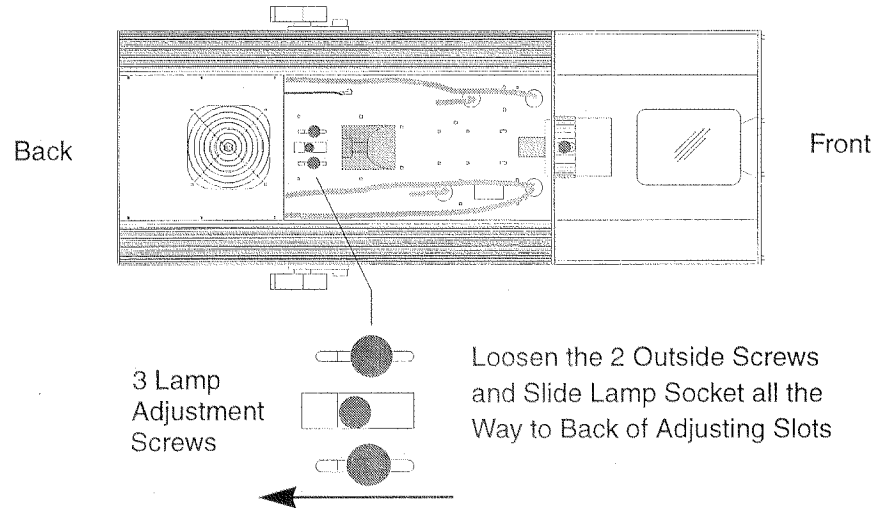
Underside Showing 3 Lamp Adjustment Screws
